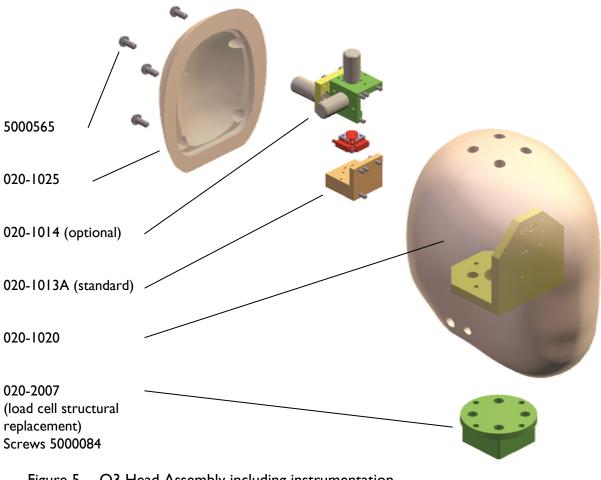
Q3 Head Assembly including instrumentation Head instrumentation - both accelerometer bracket arrangements 020-1013 (standard) and 020-1014 (optional ARS version) shown
